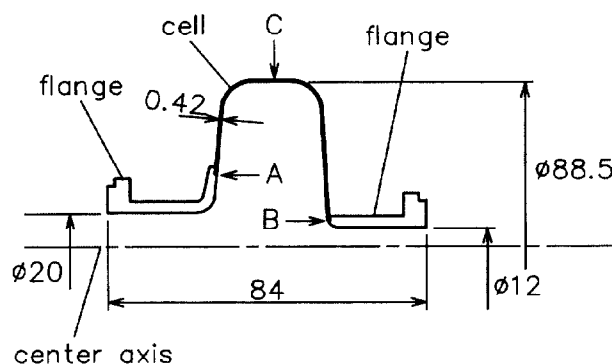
Cross section of the single cell cavity. Points A, B and C are welded.
